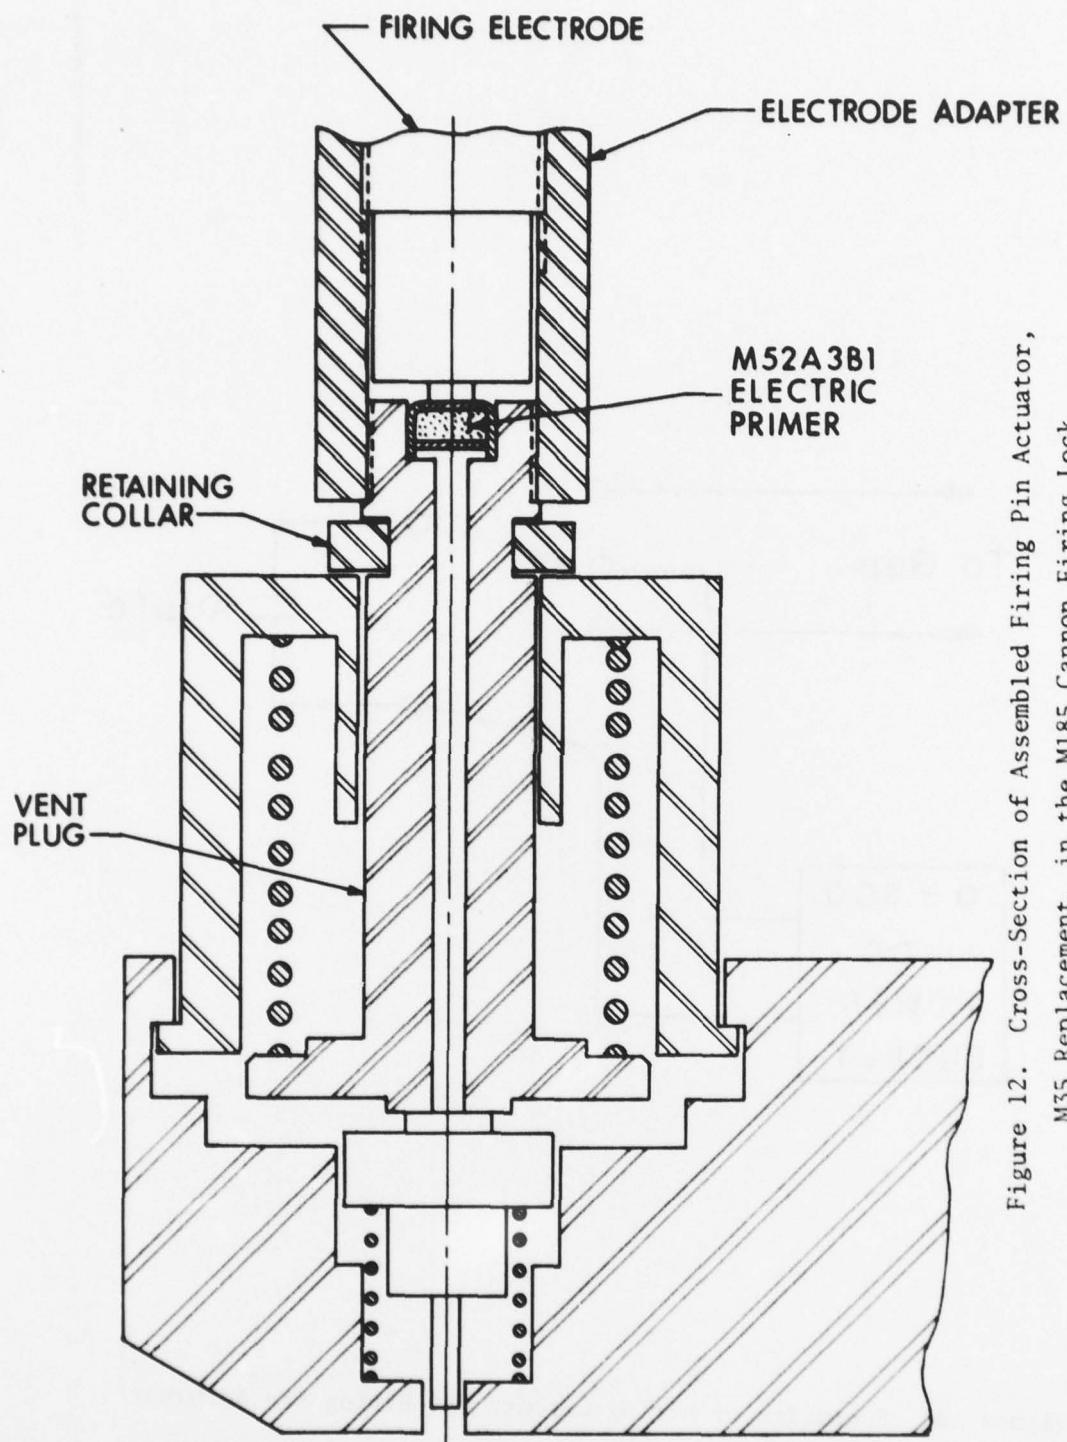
Cross-Section of Assembled Firing Pin Actuator,
